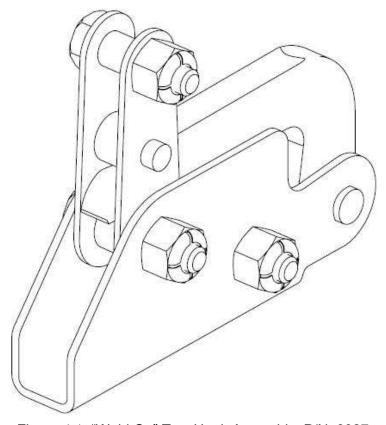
"Weld On" Tow Hook Assembly, P/N: 6027
